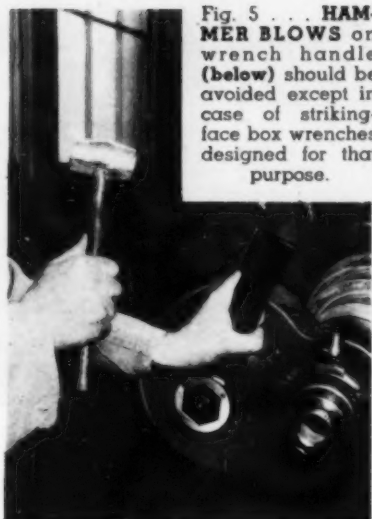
HAMMER BLOWS on wrench handle (below) should be avoided except in case of striking-face box wrenches designed for that purpose.
